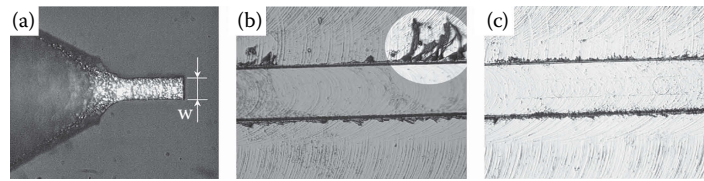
Photos of (a) fabricated micro-tool with $W = 40 \mu\text{m}$ and (b) machined slot with severe burrs, and (c) slot with minimum amount of burrs
